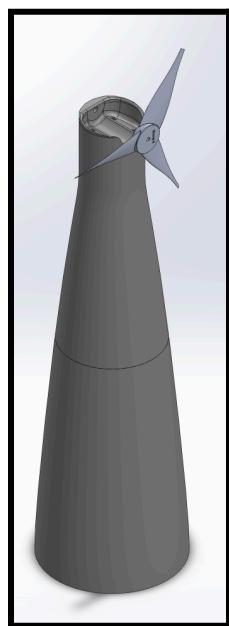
CAD rendering of the fully assembled wind turbine, showing the integrated tower and three-blade rotor configuration.
